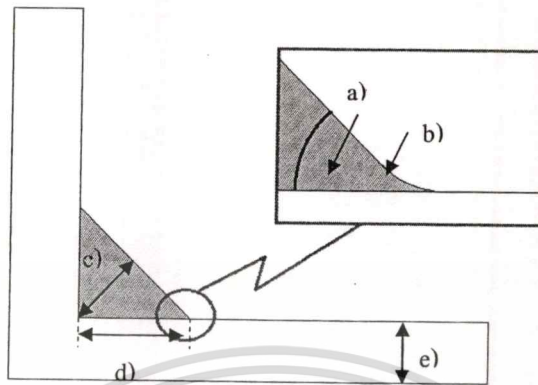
a) Weld toe angle; b) Weld toe radius; c) Weld throat;
